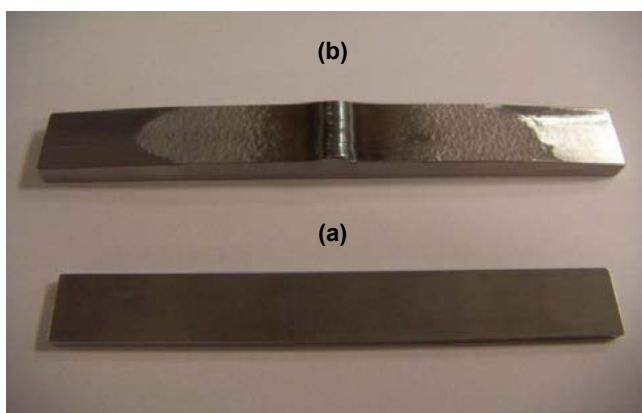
Typical Four-Point Bend Specimens: (a) Parent Material Specimen and (b) As-welded Specimen
